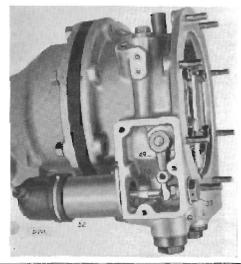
View of unit from right-hand side showing solenoid cover removed
